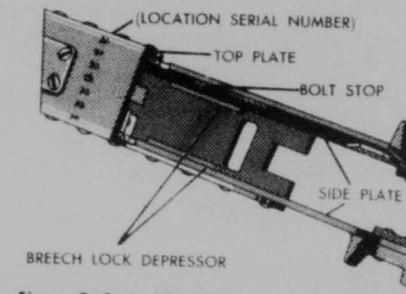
Inside of Receiver Showing Breech Lock Depressors—Top View.
